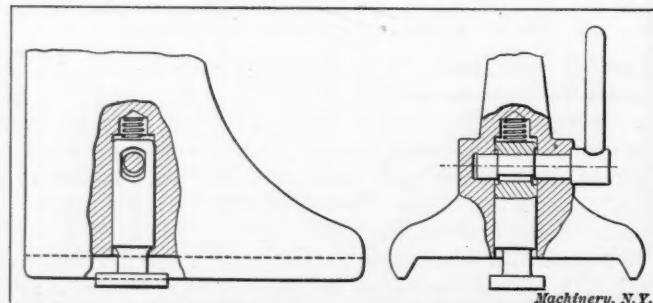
Eccentric Action Clamping Device used on Bench Lathe
